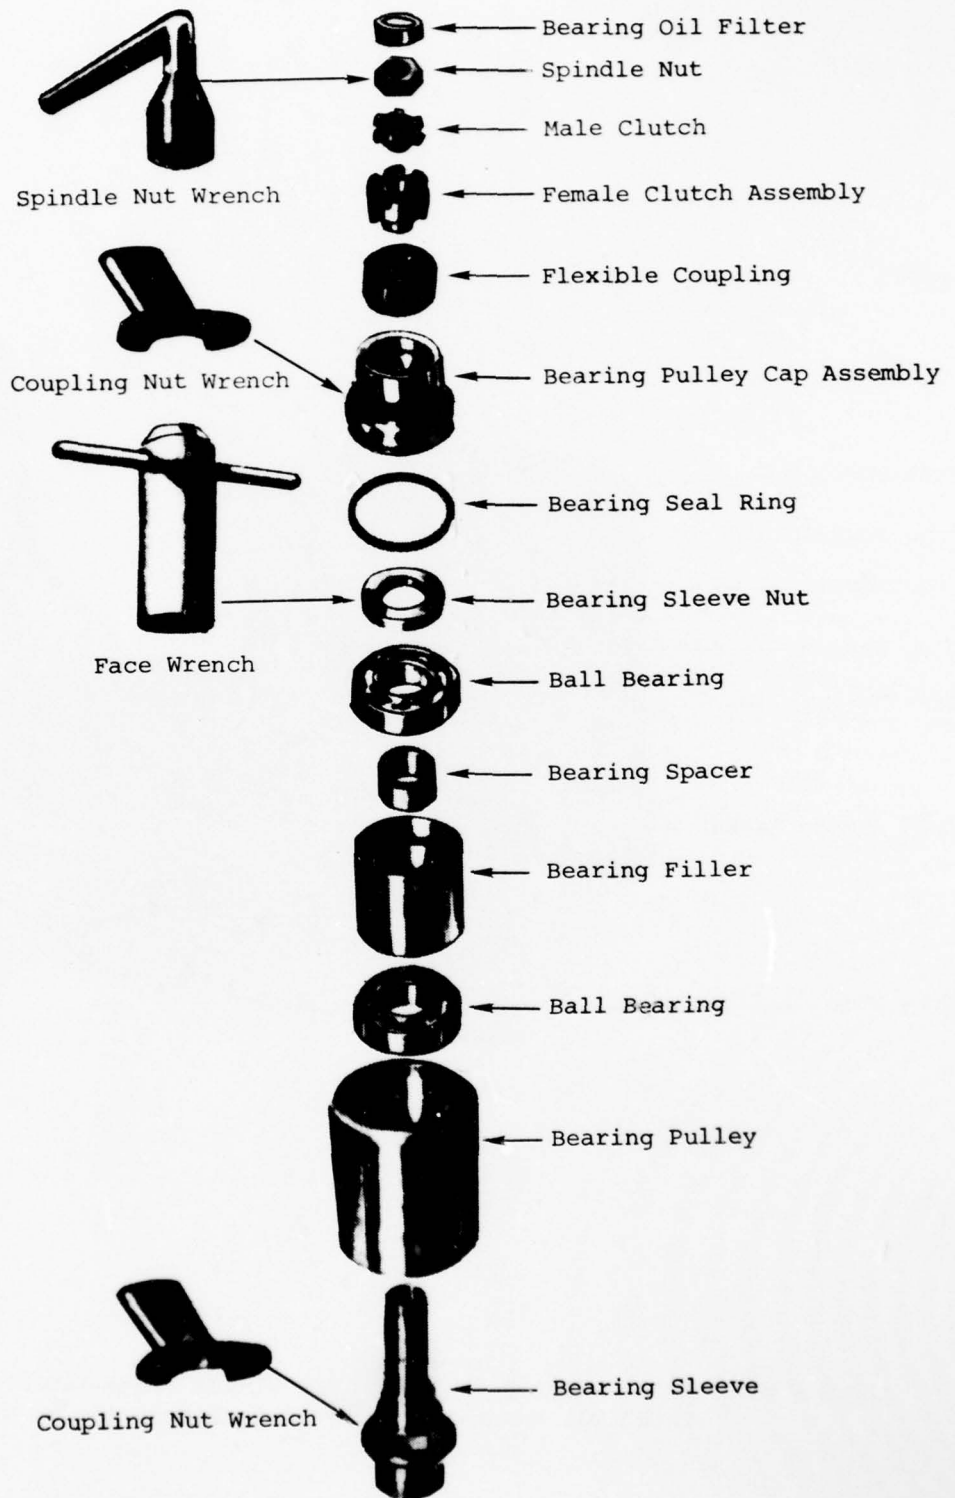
PARTS AND TOOLS OF SPINDLE BEARING ASSEMBLY (from NAVSHIPS Technical Manual 0945-003-6010, Figure 38, p. 4-8)
